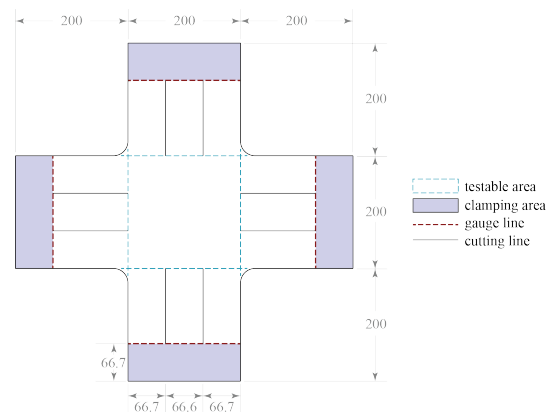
Illustration of sample dimensions in mm and cutting for biaxial testing
